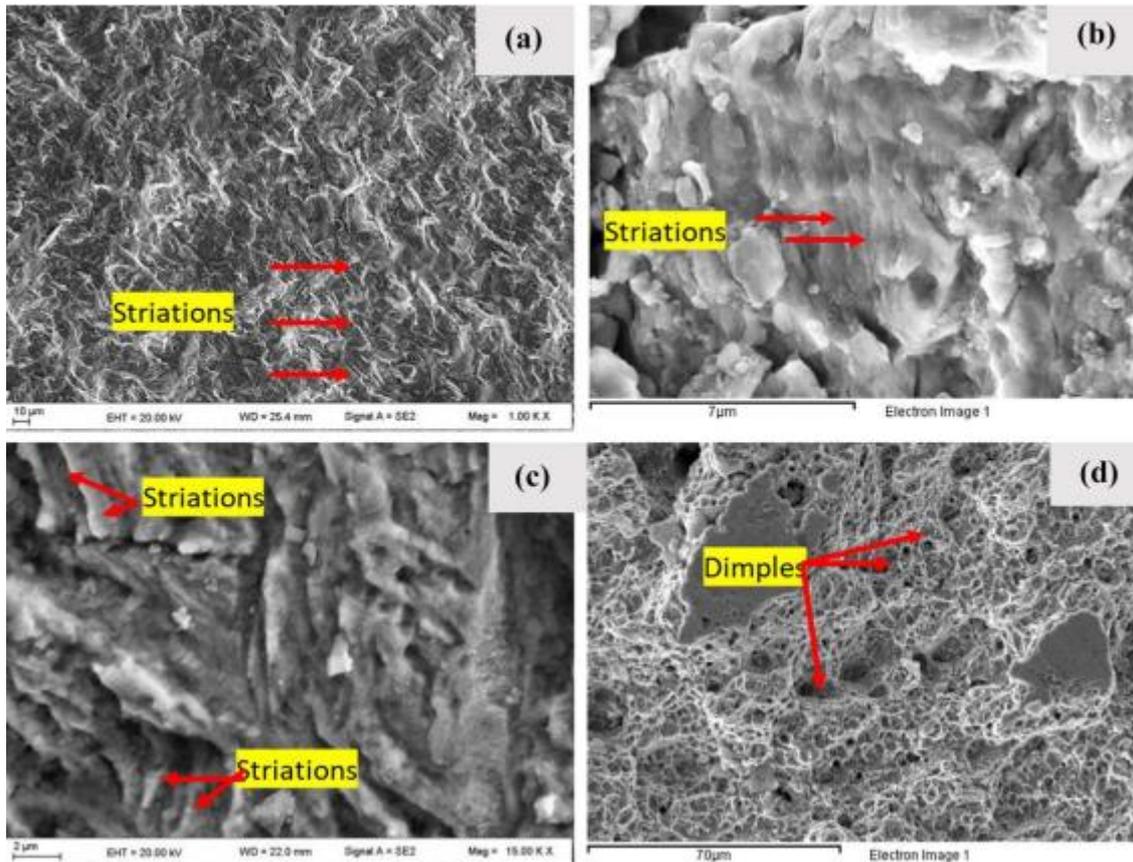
SEM microfractography a), b), c) showing fatigue striations; d) cup and cone fracture showing dimples
